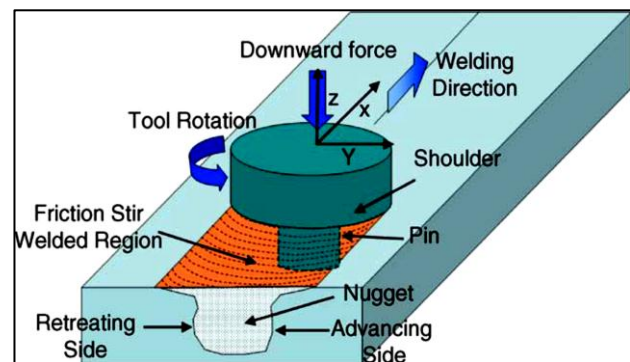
Friction Stir Welding [R.S. Mishra et al. 2005]
